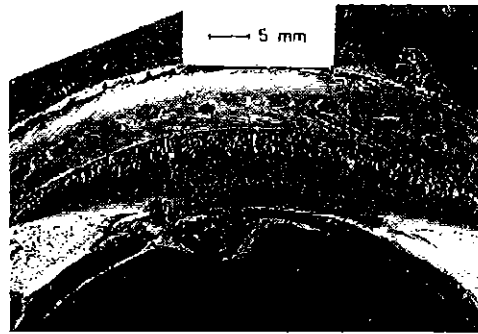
Fracture of a welded flange-tube-connection
